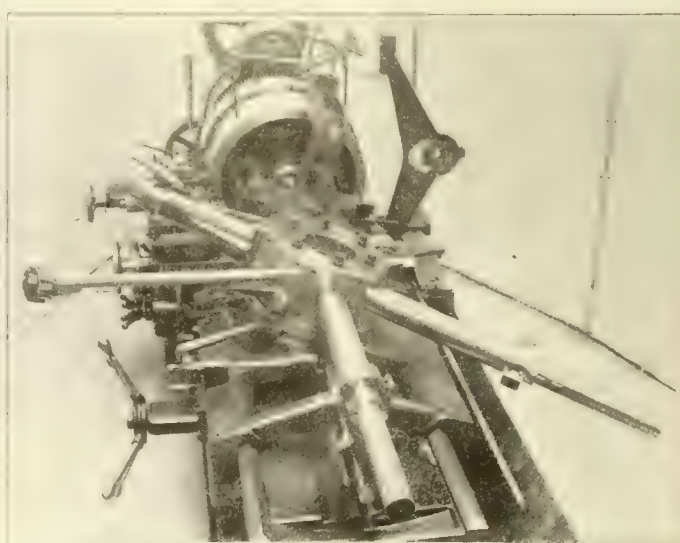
A SIMILAR VIEW SHOWING THE TOOLS USED ON THE SECOND OPERATION OF THE TRUCK WHEEL.
